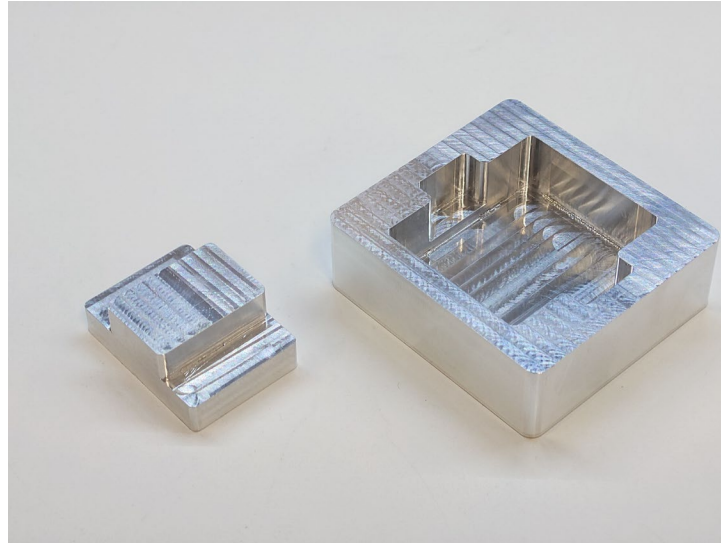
Press-out fixturing components - flat press (left) support base (right)
